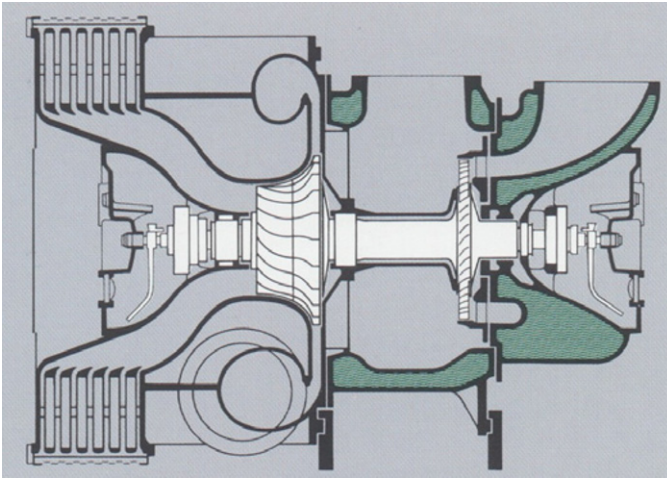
Turbocharger of a large Diesel engine of 10MW Power, compressor pressure ratio: 4.0:1 (ABB).
